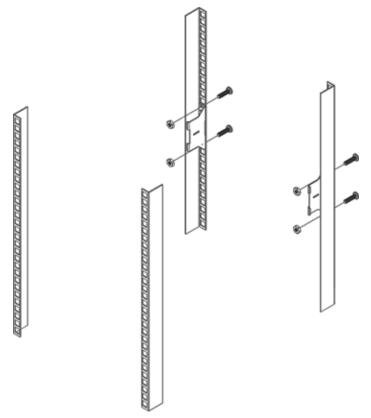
Example of Attaching Rail Supports to the Rear Rack Rails
